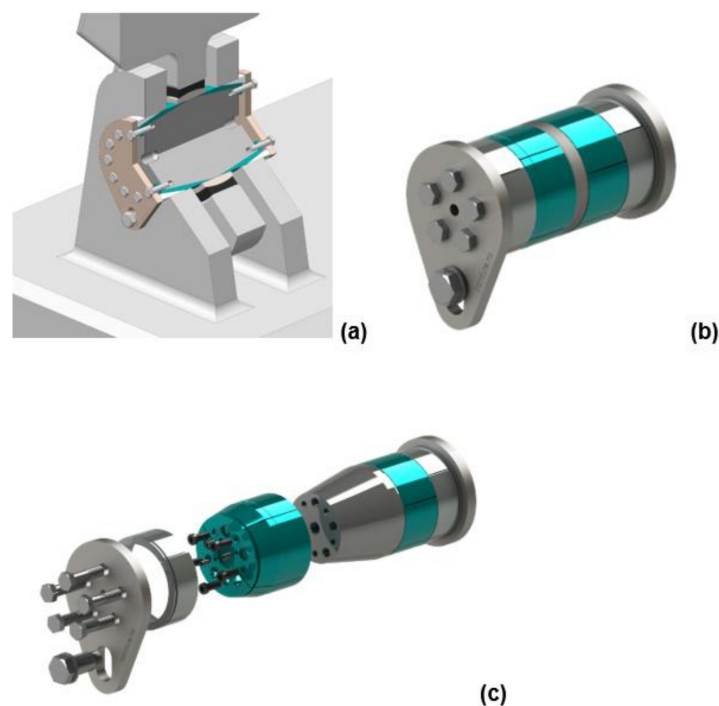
Dual expanding pin with two sets of sleeves: (a) pin in joint, (b) pin assembly and (c) exploded view.
